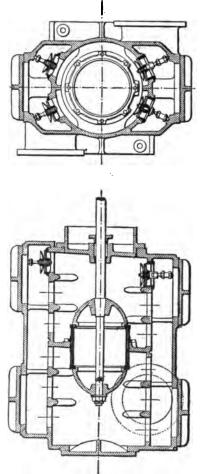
Circulating Pump.—Messrs. Hick, Hargreaves, and Co.
